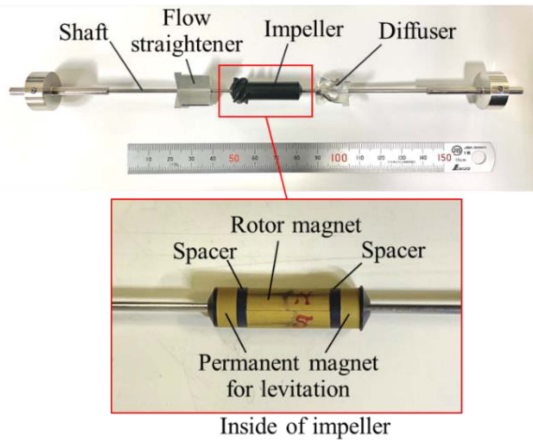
Photographs of the impeller, flow straightener, and diffuser.
